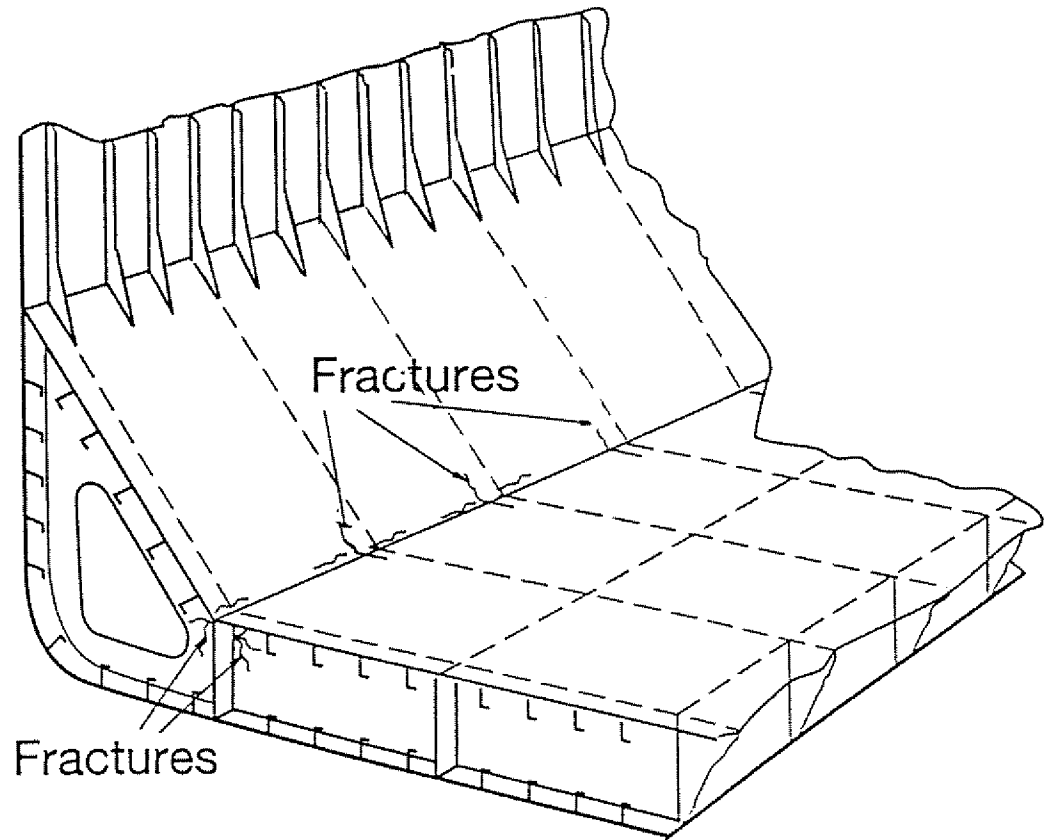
Typical Fractures in the Connection of Hopper Plating and Tanktop/Inner bottom
